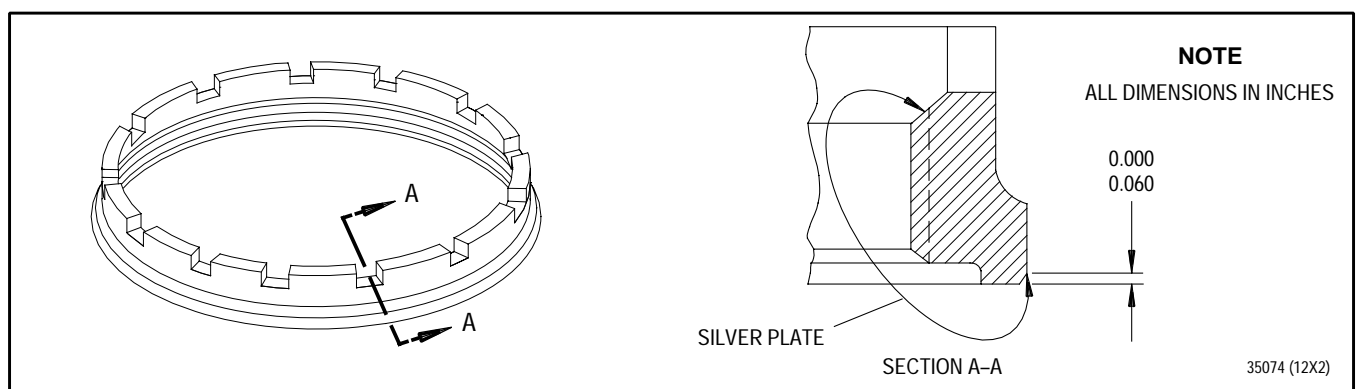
Bearing Retaining Nut (PN 4007568) - Inspection
